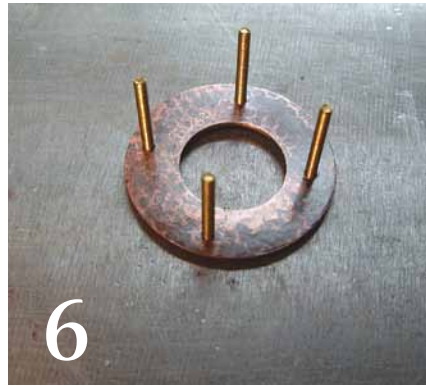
Insert 4 machine screws into drilled holes of upper circle. With screws in place, flip work and lay on bench.
